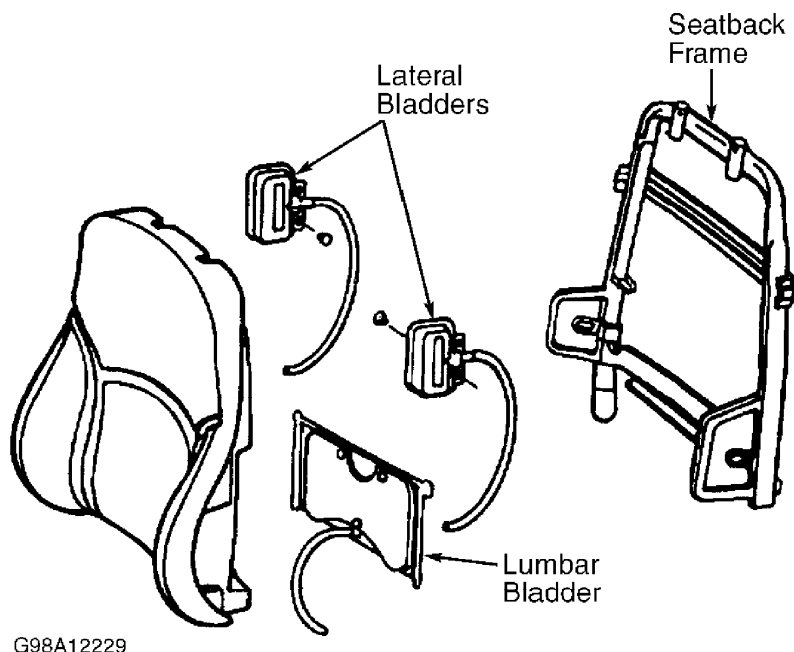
Exploded View Of Lumbar & Lateral Support Assembly
